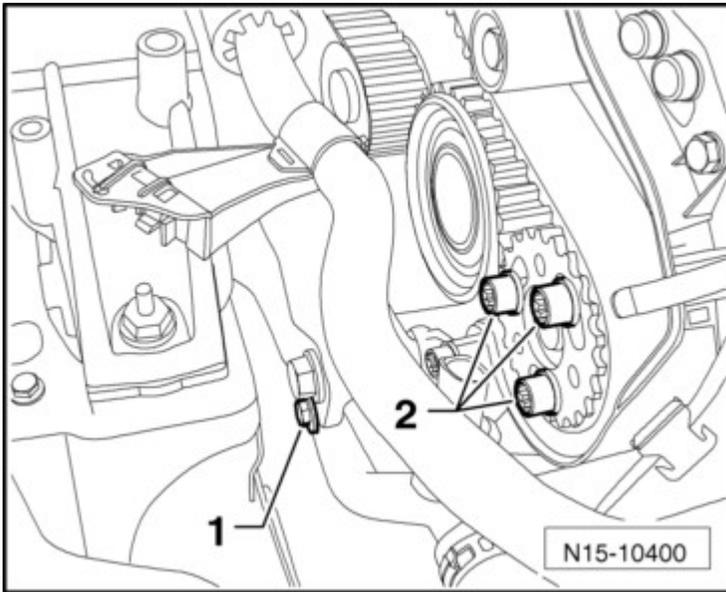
Identifying Coolant Pipe Bolt -1- And High Pressure Fuel Pump Toothed Belt Gear -2- Courtesy of AUDI OF AMERICA, LLC
